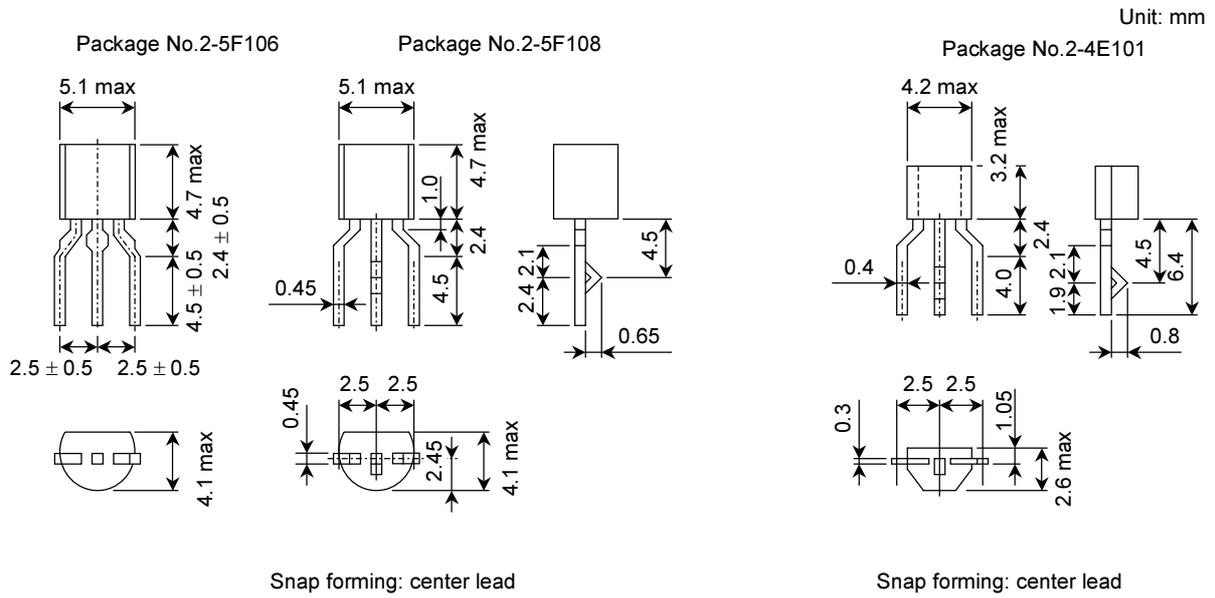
Lead-Formed TO-92 Transistor Package Dimensions
